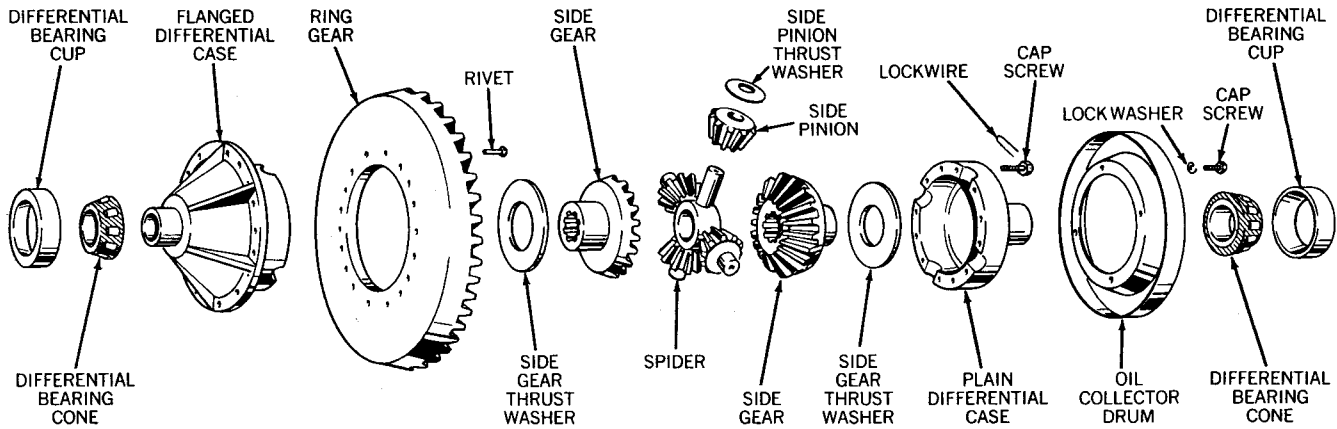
Exploded View of Axle Differential (Model 32M and 36M Axles)
